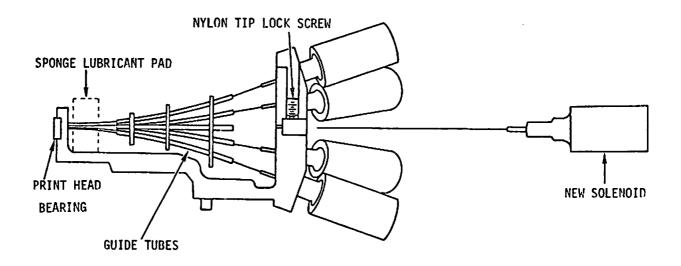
REMOVAL & REPLACEMENT OF SOLENOIDS
